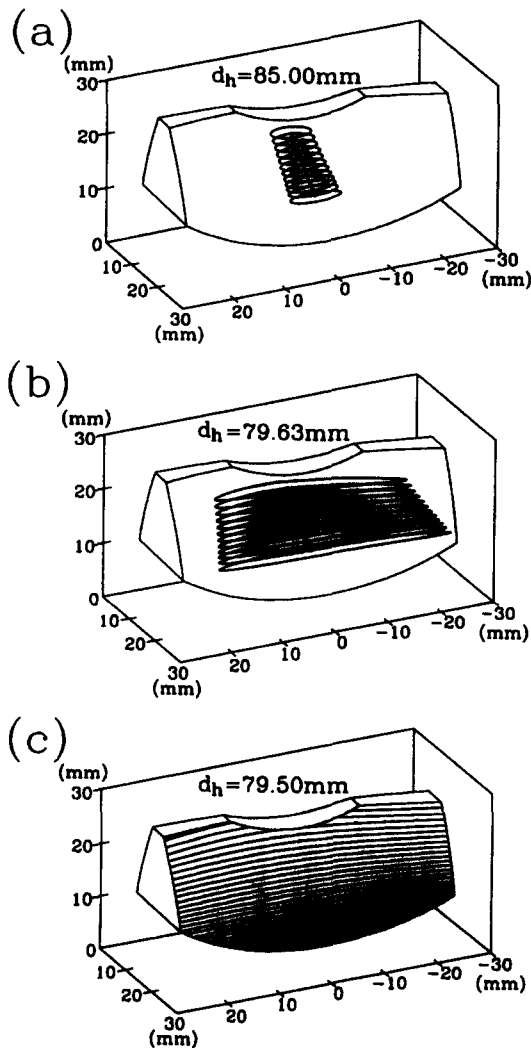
Bearing contacts and contact paths of a ZE-type worm gear set using different oversize hob cutter pitch diameters.
